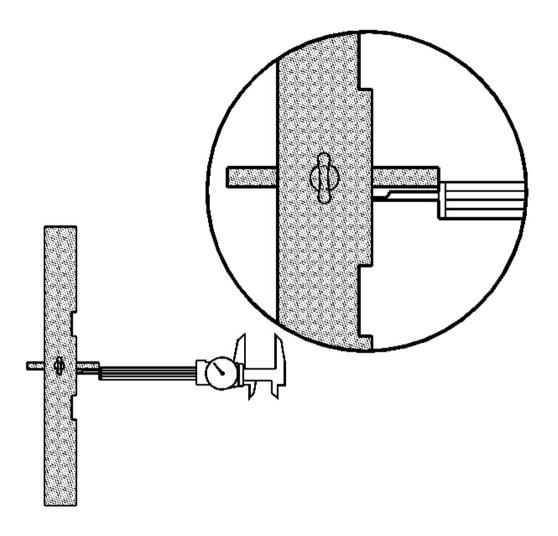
Measuring The Length Of Gage Rod Protruding & Gage Bar Courtesy of GENERAL MOTORS CORP.
